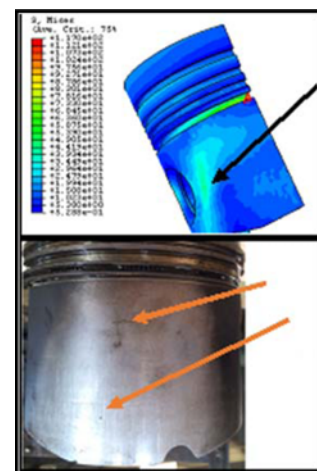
Skirt: Contact surface with the cylinder: Scratches and damage.
